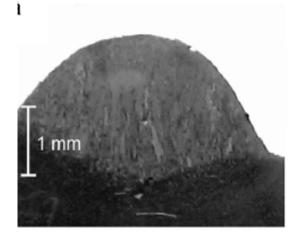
Cross-section of weld pool for sample S1 (97.5% $Ar + 2.5\%CO_2$) [2]
